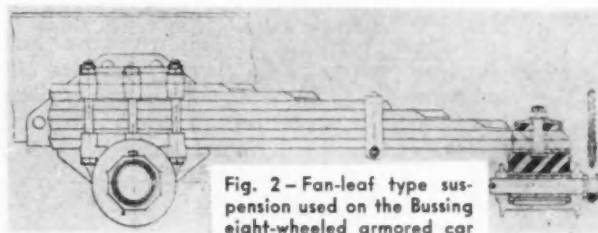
Fan-leaf type suspension used on the Bussing eight-wheeled armored car
